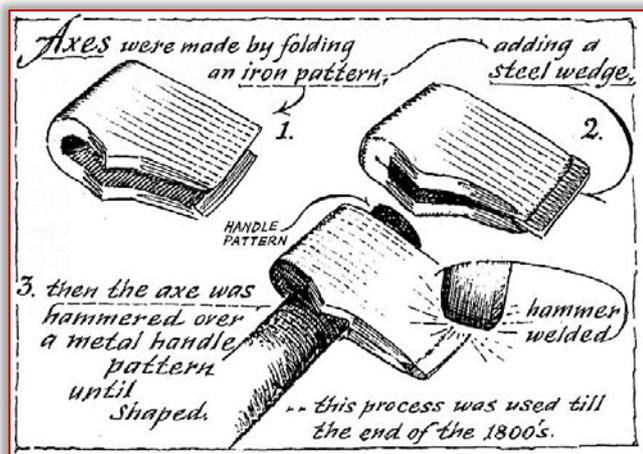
Principal operations in forge welding of an axe with insert
